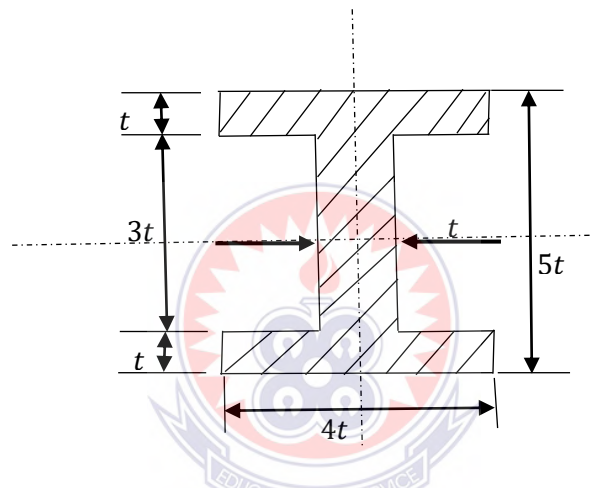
Cross -Section of an I-Section Connecting Rod
